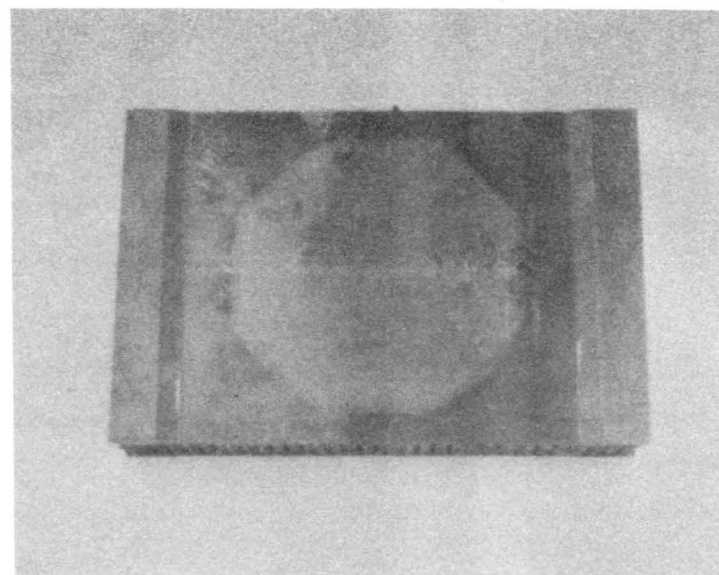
Typical Failure Mode Specimen EX367/368-6, 600°F Test,
